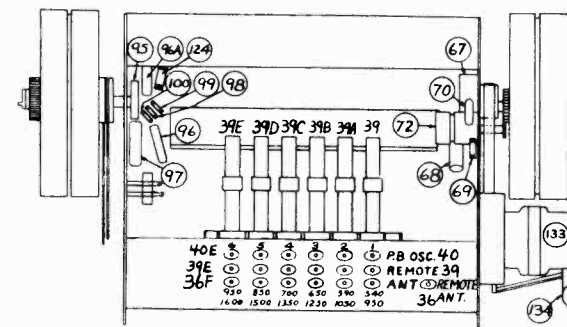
LOCATIONS OF PARTS, TUNING UNIT
